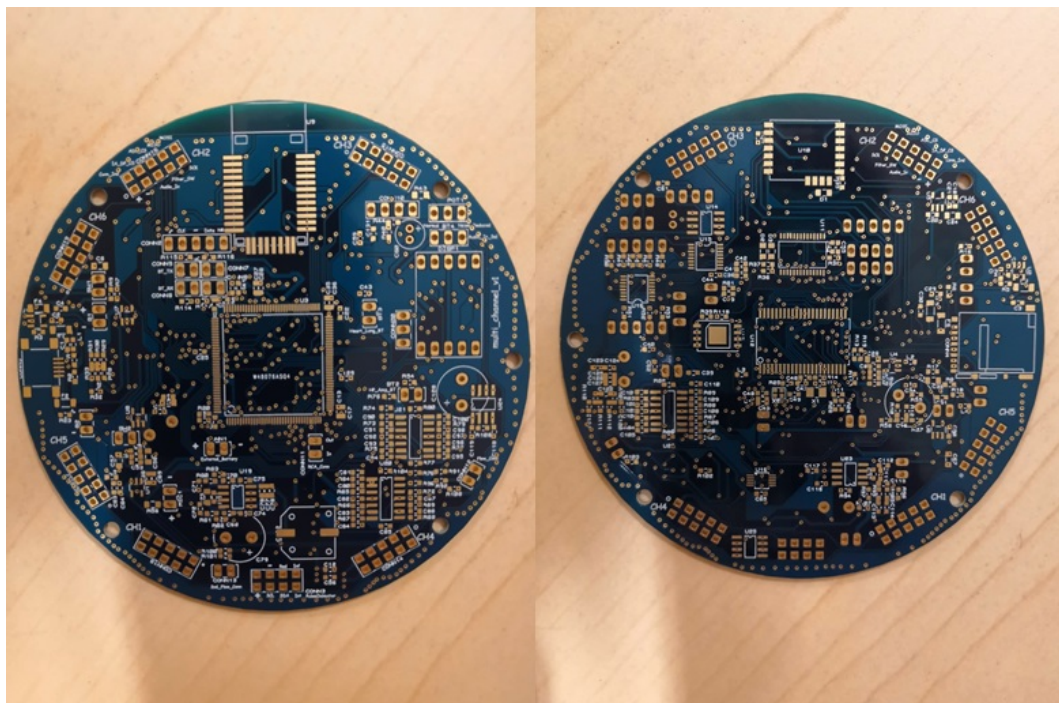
Top and Bottom Sides of Manufactured PCB of the Main Board.
